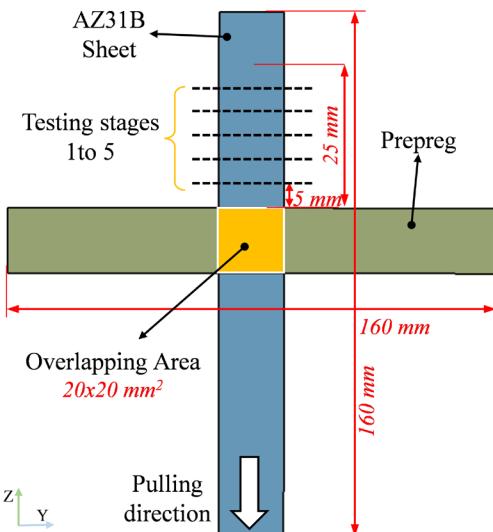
Sketch and dimensions of the specimen used in the stop-start pull-through tests.
